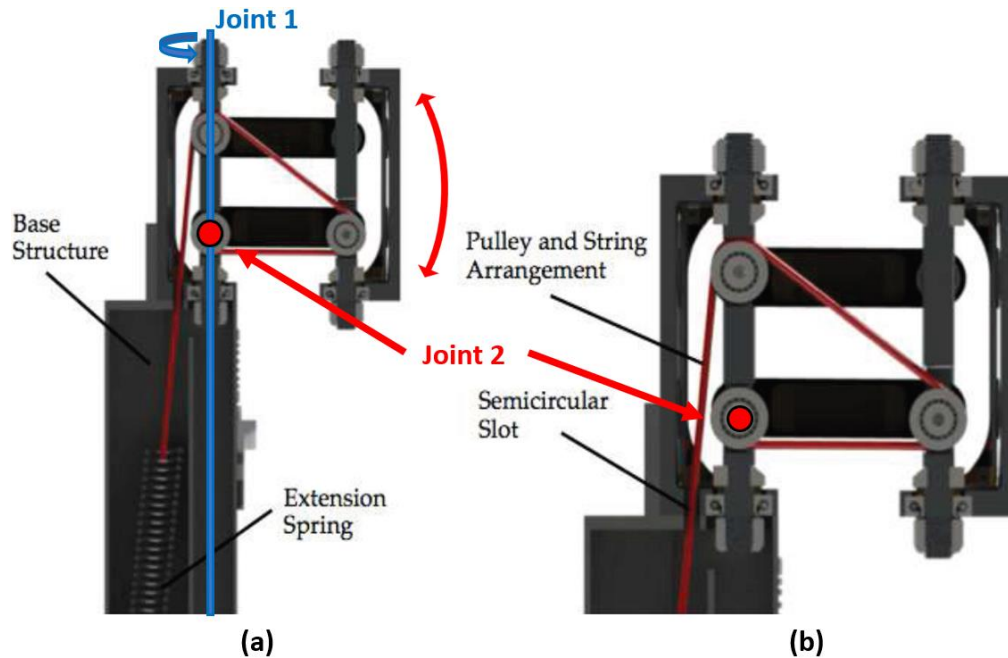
a) Existing balancing mechanism using a linear spring for joint 2. b.) Enlarged view of the cable-pulley assembly in joint 2. Image adapted from Trimble (2016).
